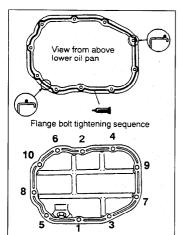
Apply sealant and tighten the bolts in the order shown—3.5L engine, lower oil pan shown
